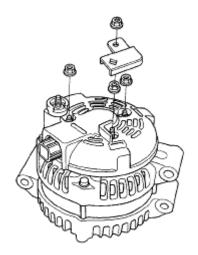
Identifying Harness Stay And Flange Nuts From Alternator
